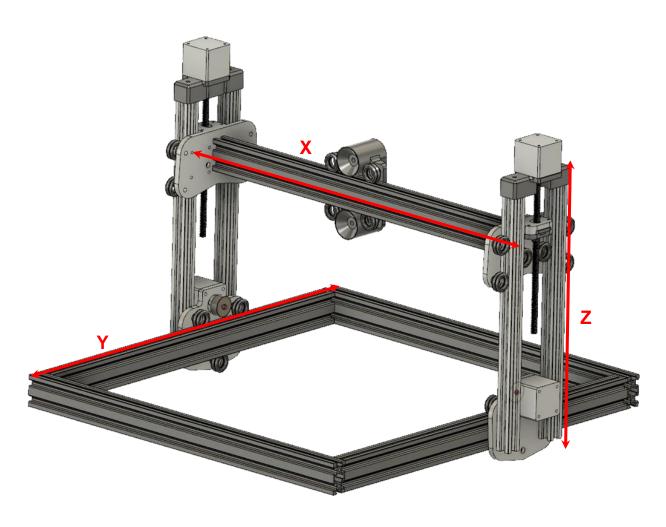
A design assembly depicting the structural framework of the CNC machine design, axes labeled. This is assembled primarily using OpenBuilds V-slot extrusions.
